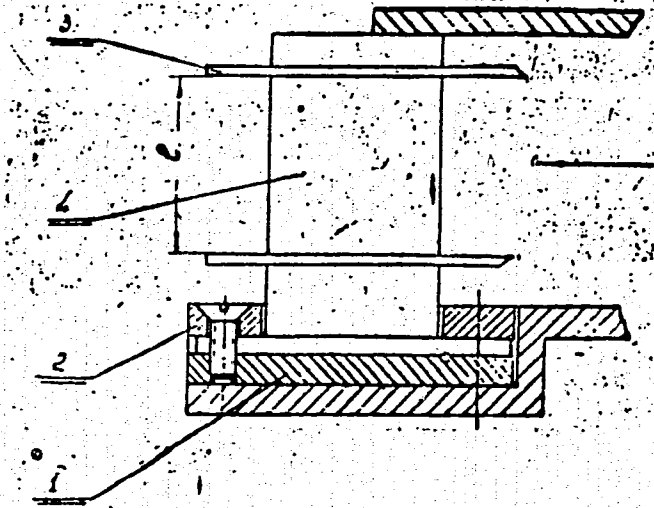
A schematic illustration of a blade with end plates, showing fastening in the rig
